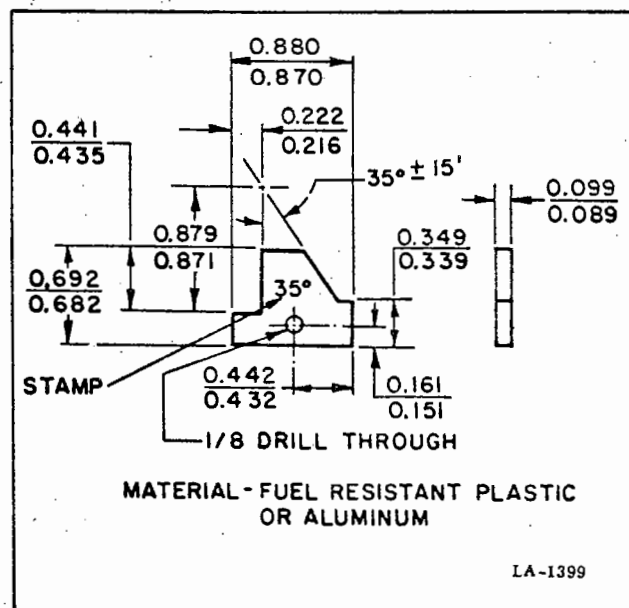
Dimensions for Manufacturing the T25939 Gage
